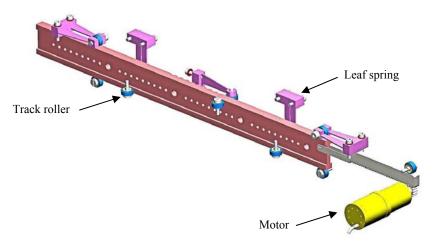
Slit slider mechanisms showing the general mechanism principle; 5 accurately positioned ball bearings that act as track rollers with 5 additional spring loaded bearings positioned opposite these 5 track rollers and a motor attached to the carriage to allow a sliding motion.
